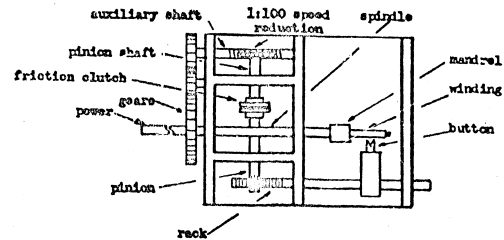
Solenoid Winding Machine with Friction Clutch.
